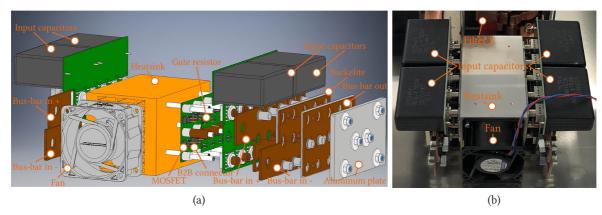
Detailed views of the semiconductor assembly (a) exploded view on the heat-sink and (b) realization of the full-bridge switching cell.
